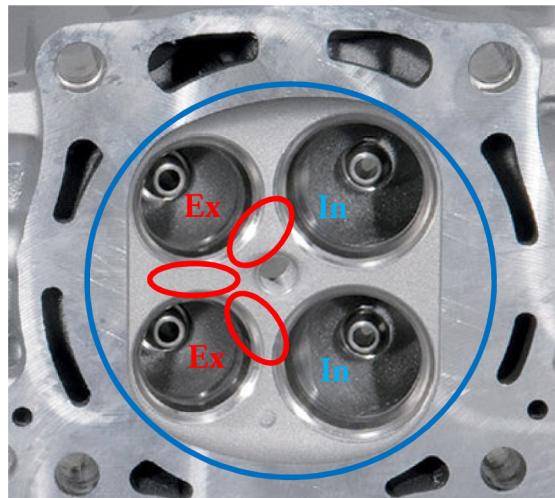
Hot (red) and cold (blue) areas on the cylinder head side
